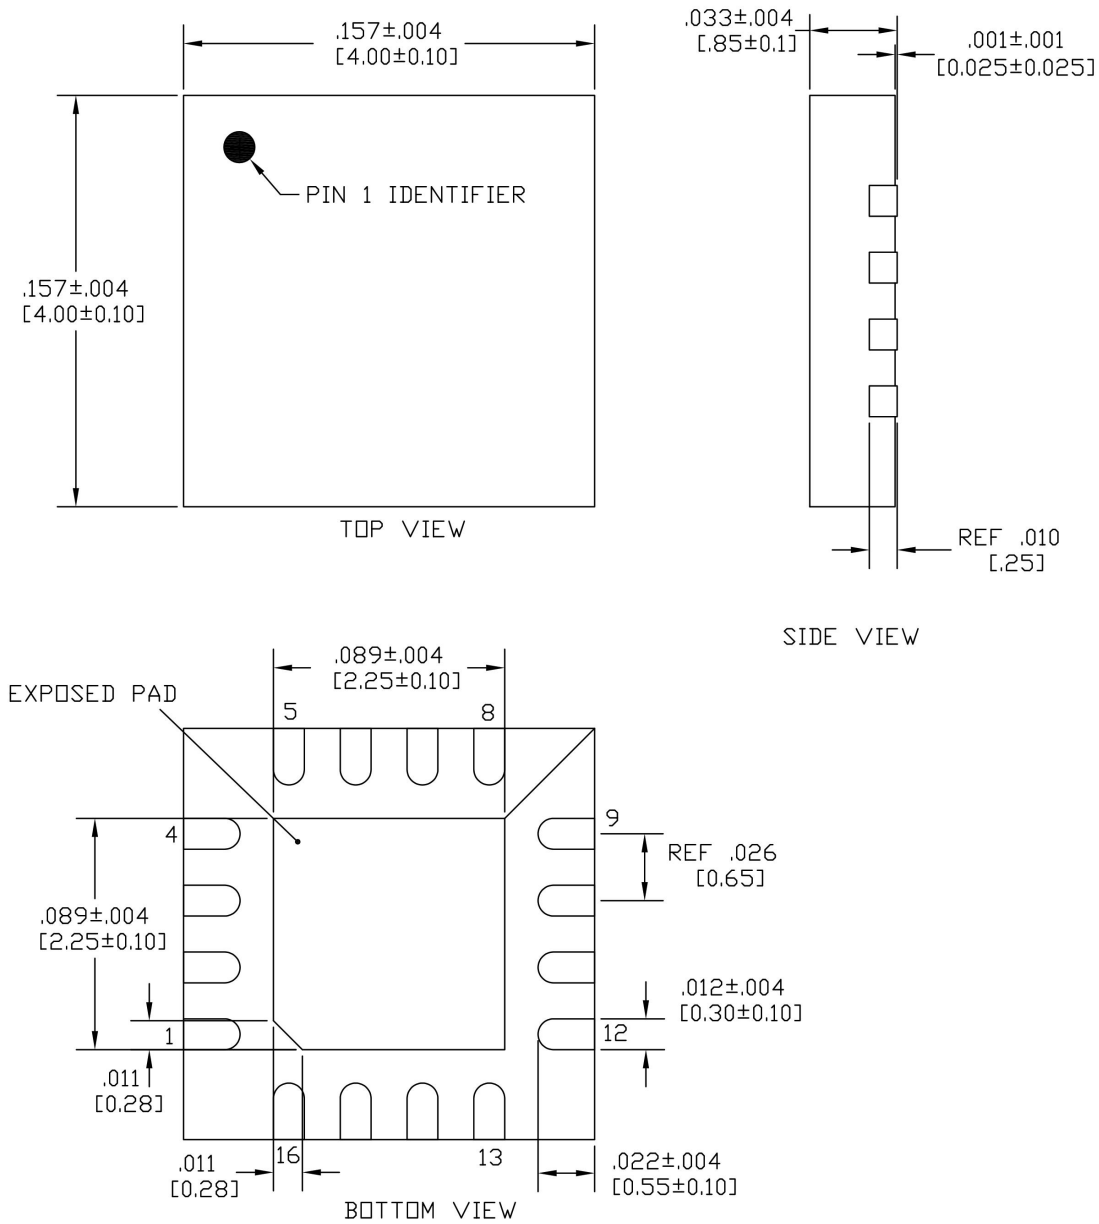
QFN4X4-16 Plastic Package Dimensions (all dimensions in inches [millimeters])
